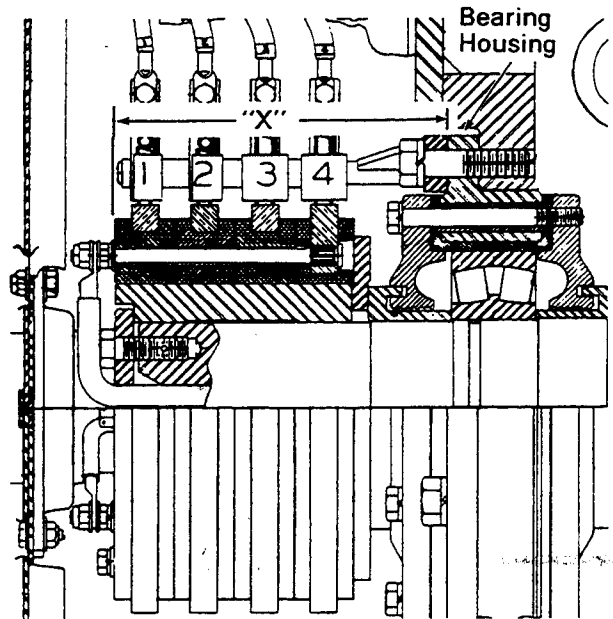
Model AR10 Small Bearing "X" (Protrusion) Measurement
